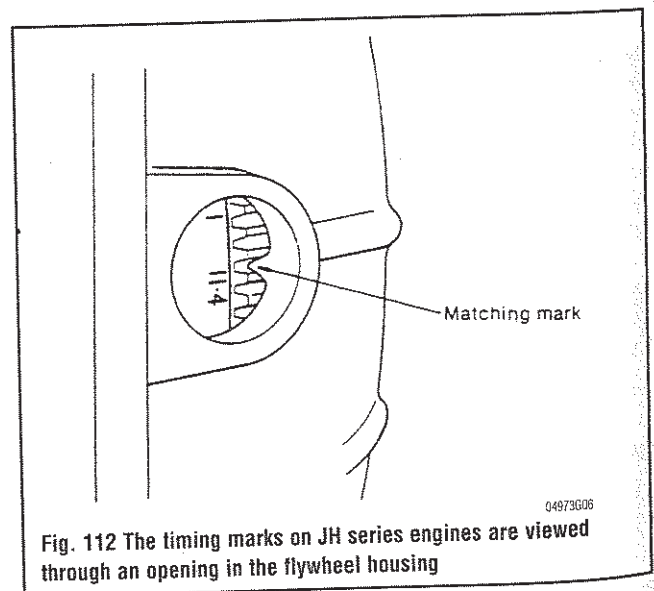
The timing marks on JH series engines are viewed through an opening in the flywheel housing
